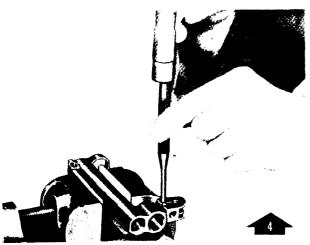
Disassembly/assembly of gas cylinder group. (1 of 2)
